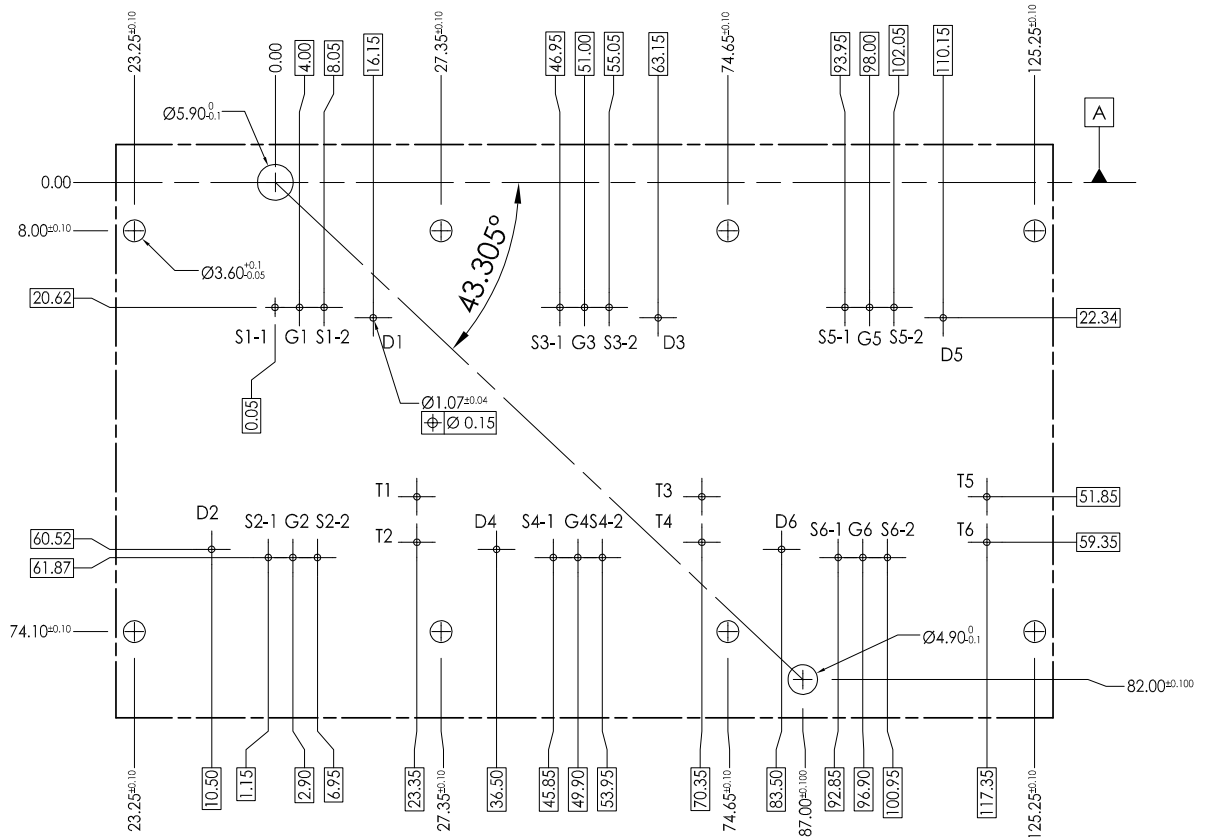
ACEPACK DRIVE PCB drawing (dimensions are in mm.)
